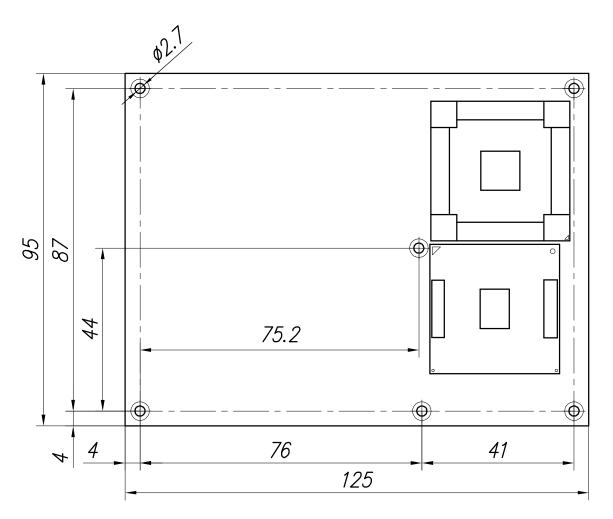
CPC1301 Mounting Dimensions Diagram, Bottom View
